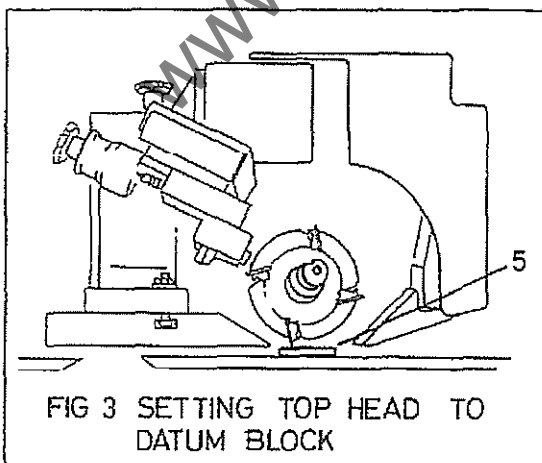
SETTING TOP HEAD TO DATUM BLOCK
